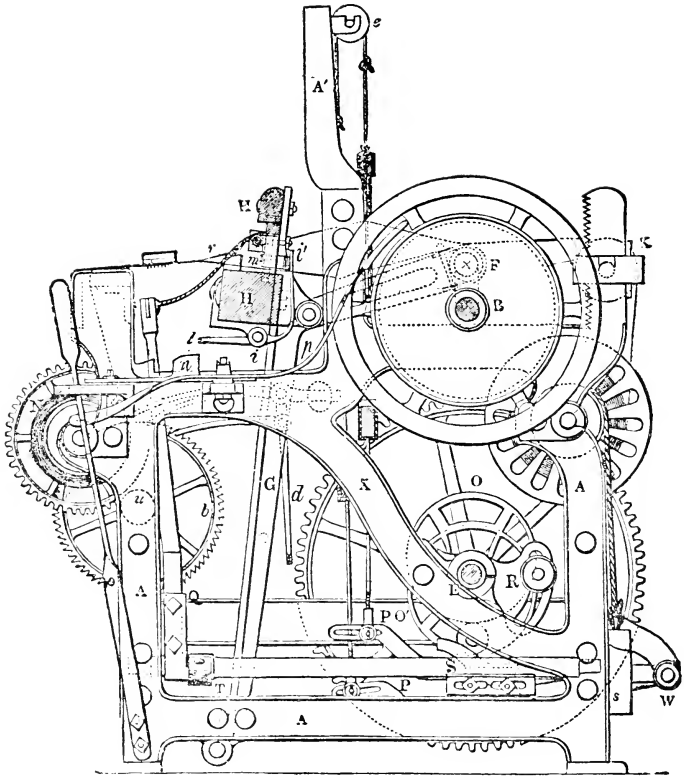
ROBERTS LOOM. SIDE ELEVATION.
